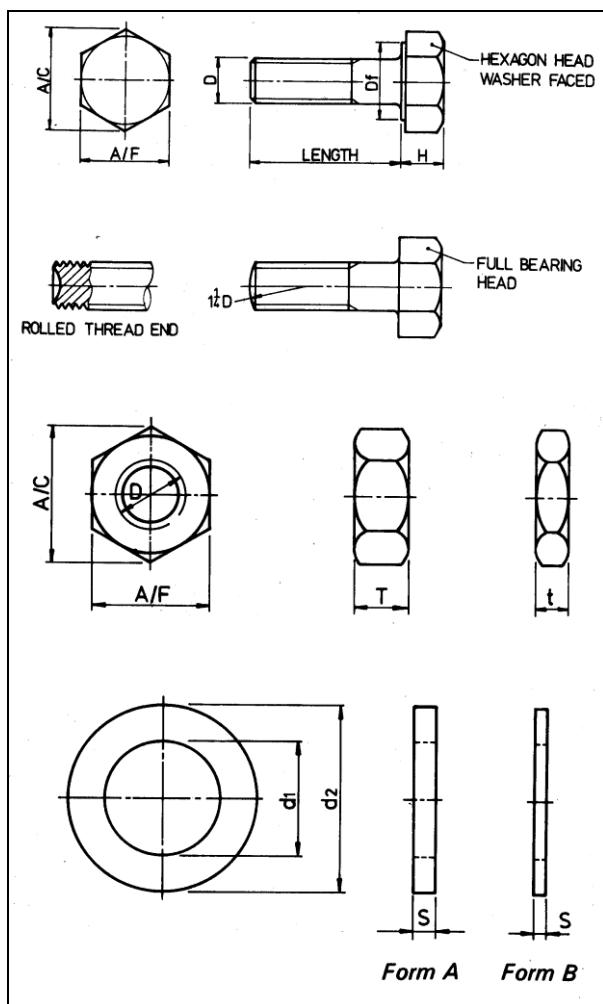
Drawing and Dimensioning a) Male and b) Female Threaded Features
